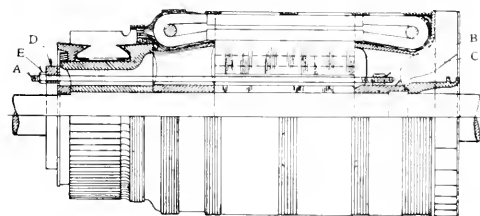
JIG FOR REMOVING SHAFT OF RAILWAY MOTOR WITHOUT TEARING DOWN THE ARMATURE
